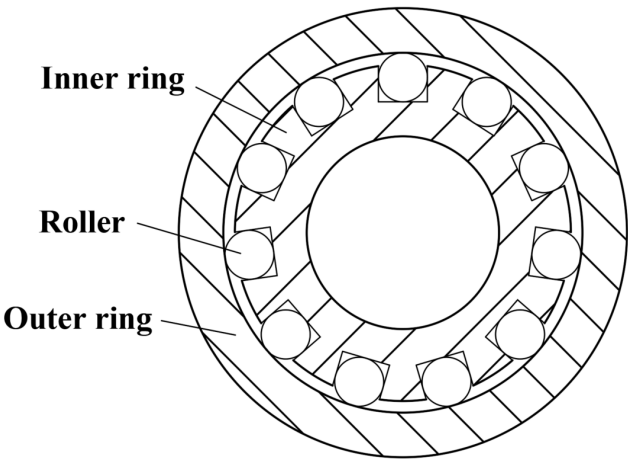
Cageless bearing for use with mechanical device WO2014039797A1.
